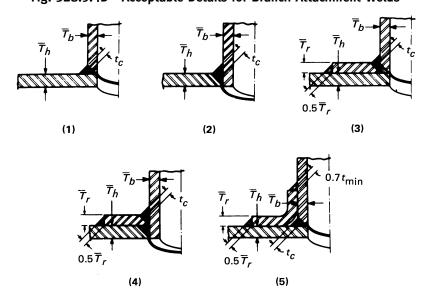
D Acceptable Details for Branch Attachment Welds
